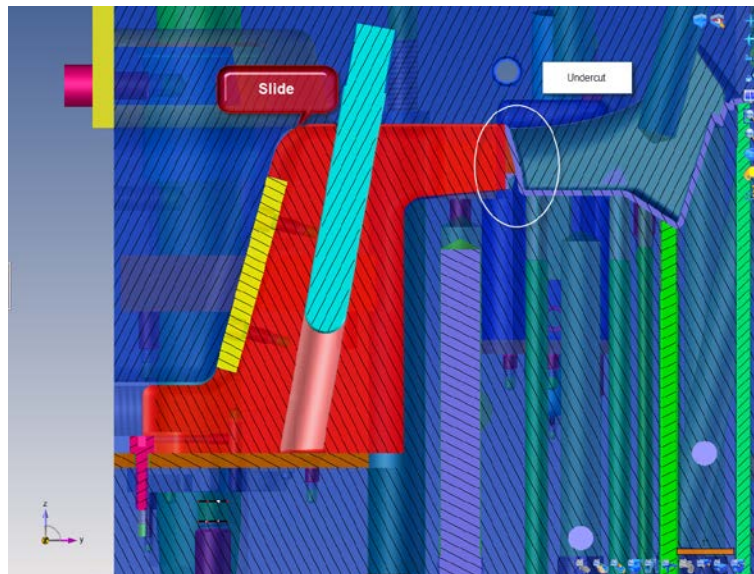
SLIDE AND UNDERCUT ON A PART TO BE MOULDED
